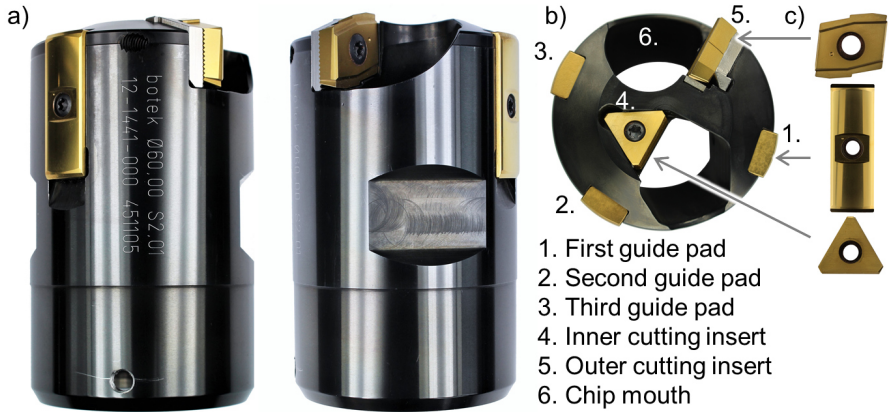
Drill head type 12 by Botek: a) side views; b) top view; c) cutting inserts and guide pads of the drill head
